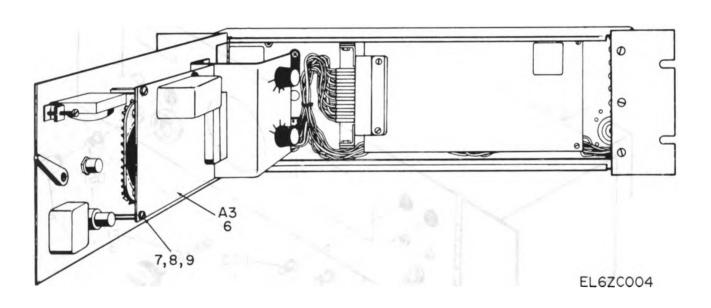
Front Panel Assembly (Sheet 2 of 2).
